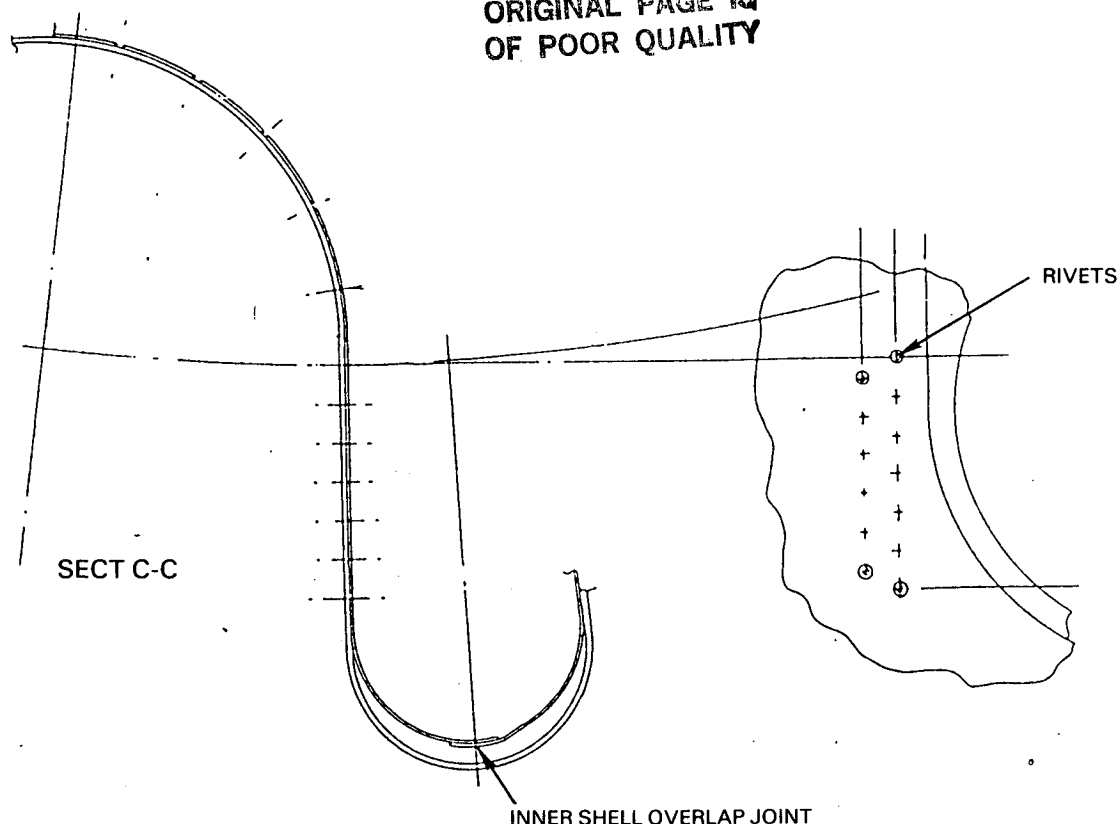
Mixer Inner and Outer Shell Joining Technique
